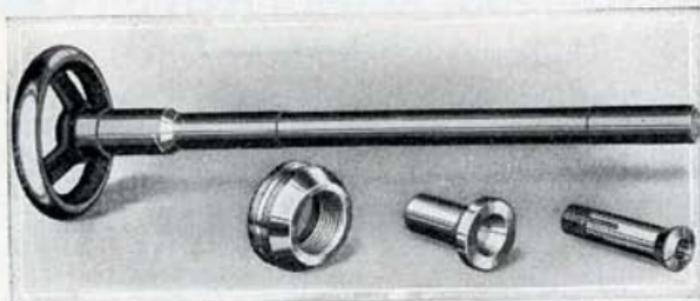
Hand Wheel Draw-in Collet Chuck Attachment.
